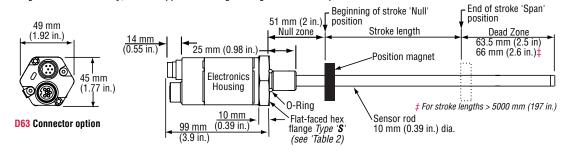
Model RH Rod-style sensor dimension reference (shown with D63 connector option)
